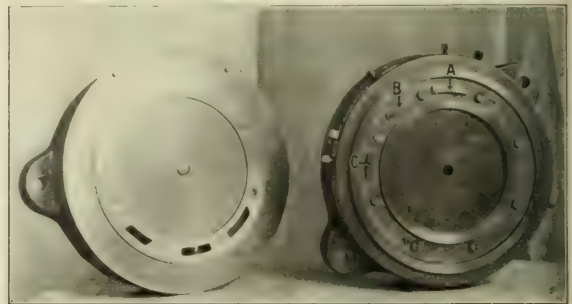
Dies for Stamping Gaskets for Air Pump Heads.
